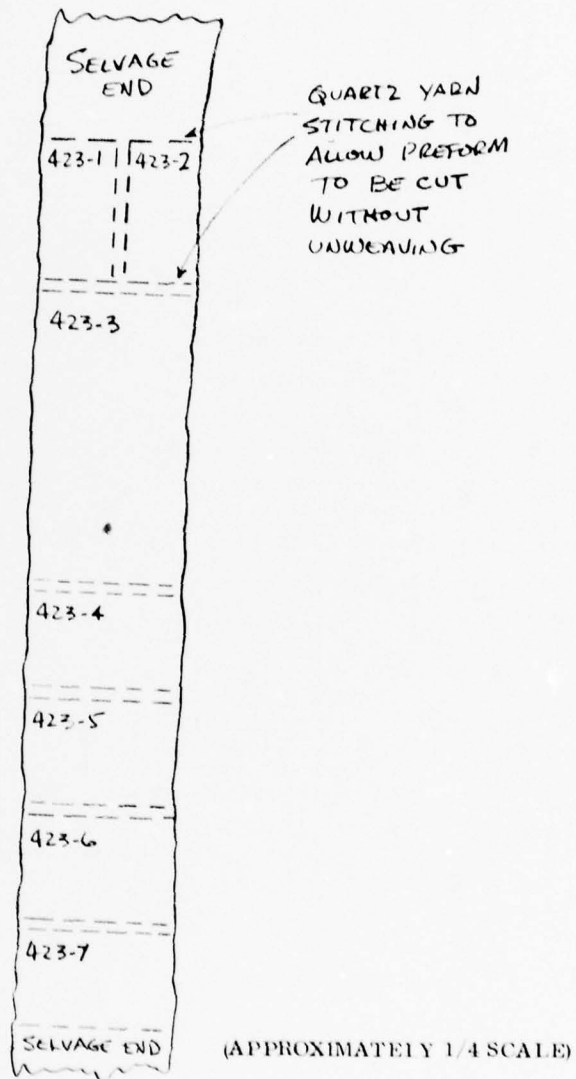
Astroquartz Omniweave Preform 423 Sectioning Plan
